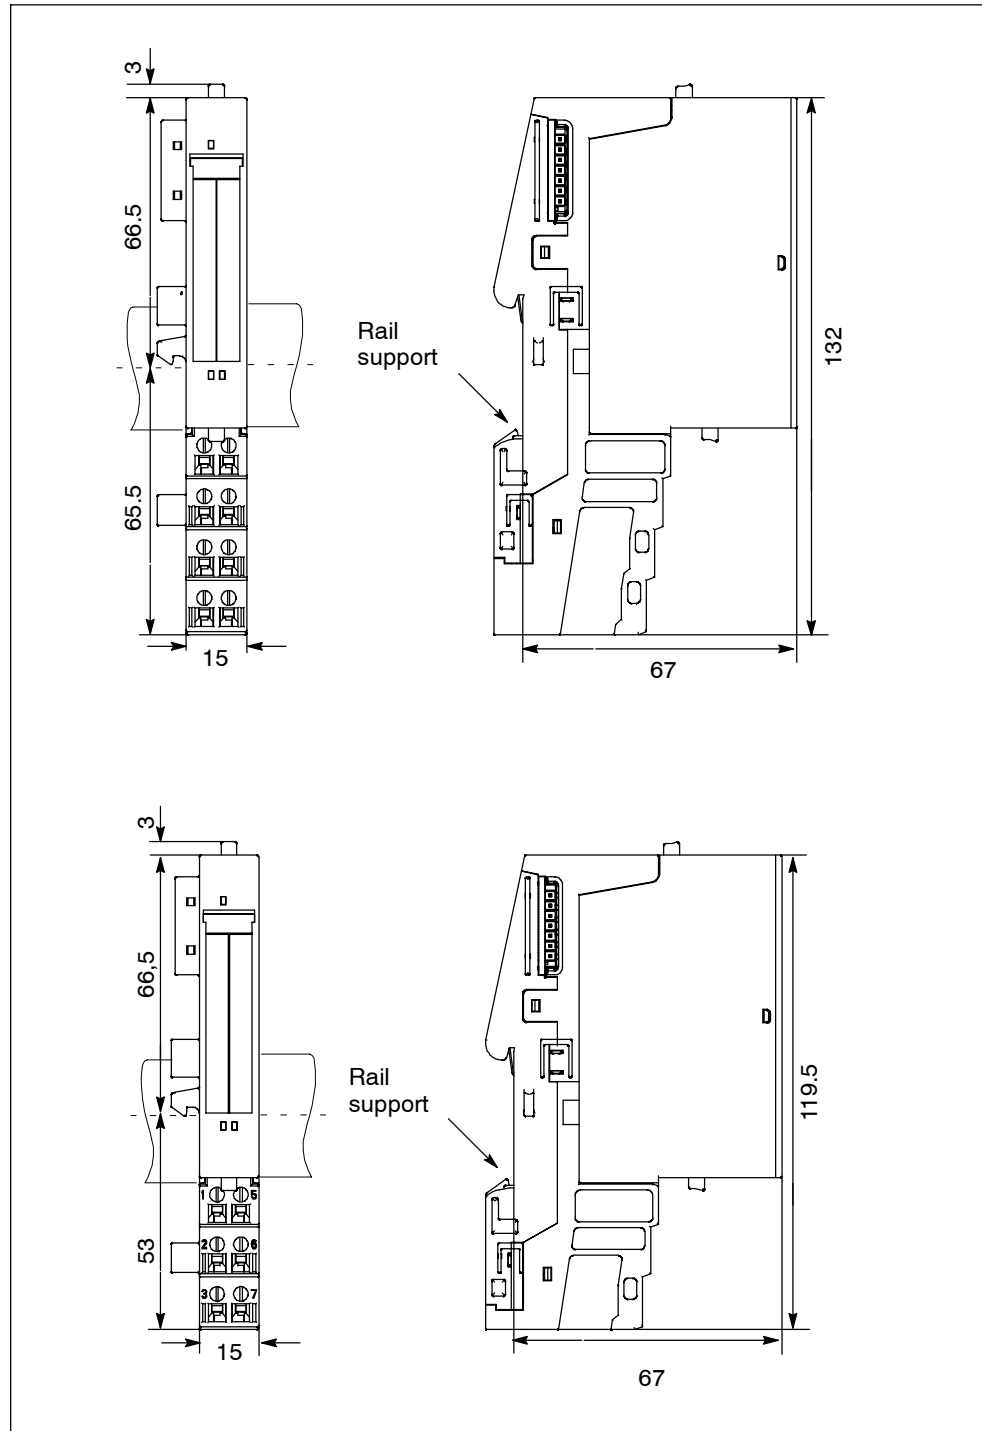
Dimension drawing for terminal modules (screw-type/spring terminals) with an electronic module inserted
